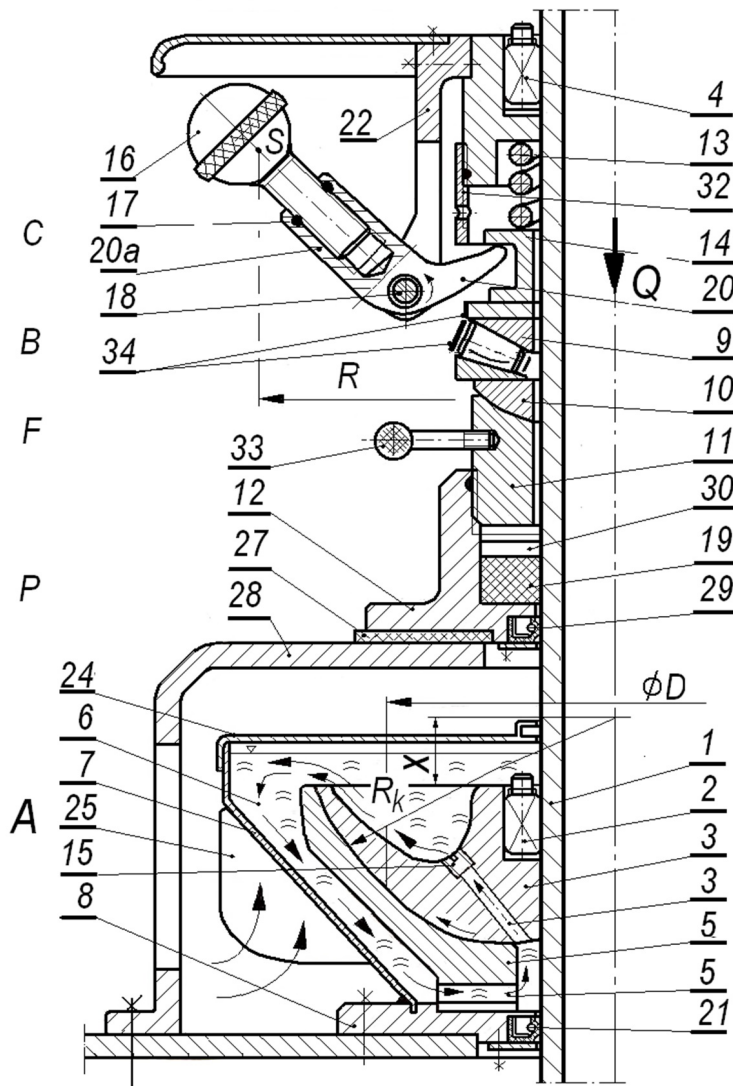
Combined bearing of a wind turbine shaft with vertical axis of rotation, consisting of the main sliding bearing A with hydrodynamic lubrication, the rolling bearing B supporting the start-up and run-out and the transverse journal bearing P (laterally stabilizing the wind turbine shaft)
